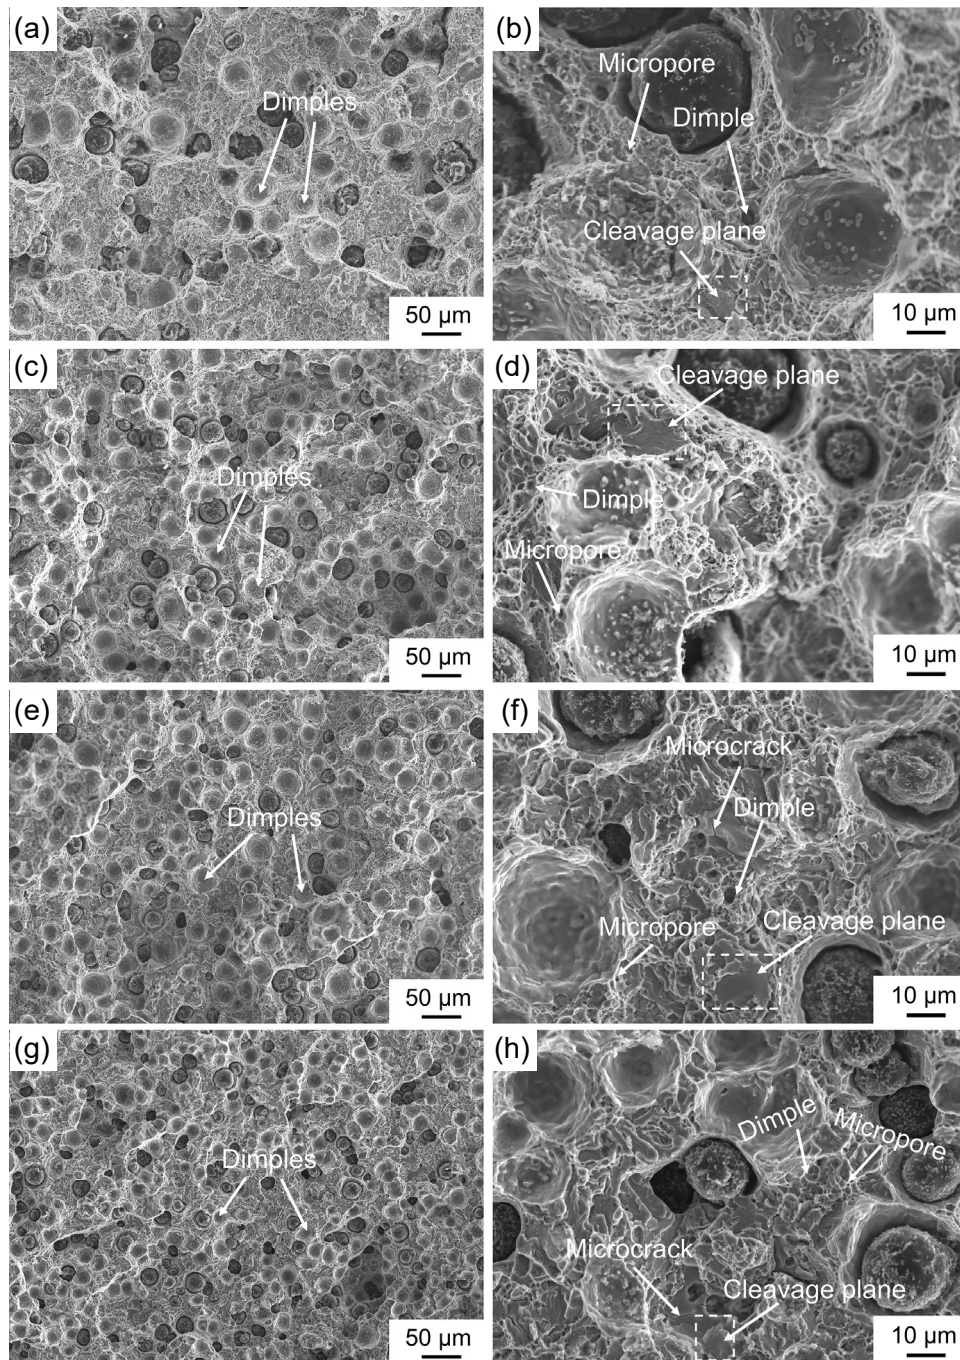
Tensile fracture morphologies of ADI samples: (a), (b) G-200; (c), (d) G-300; (e), (f) G-400; (g), (h) G-600
